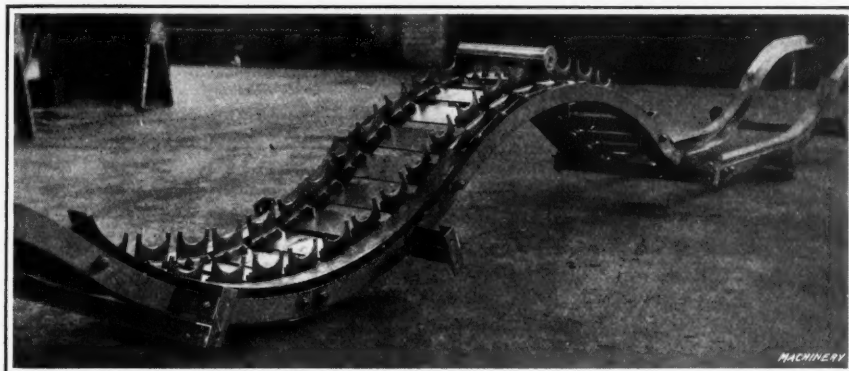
Chain Belt Conveyor for carrying Shells through Pickling Bath
